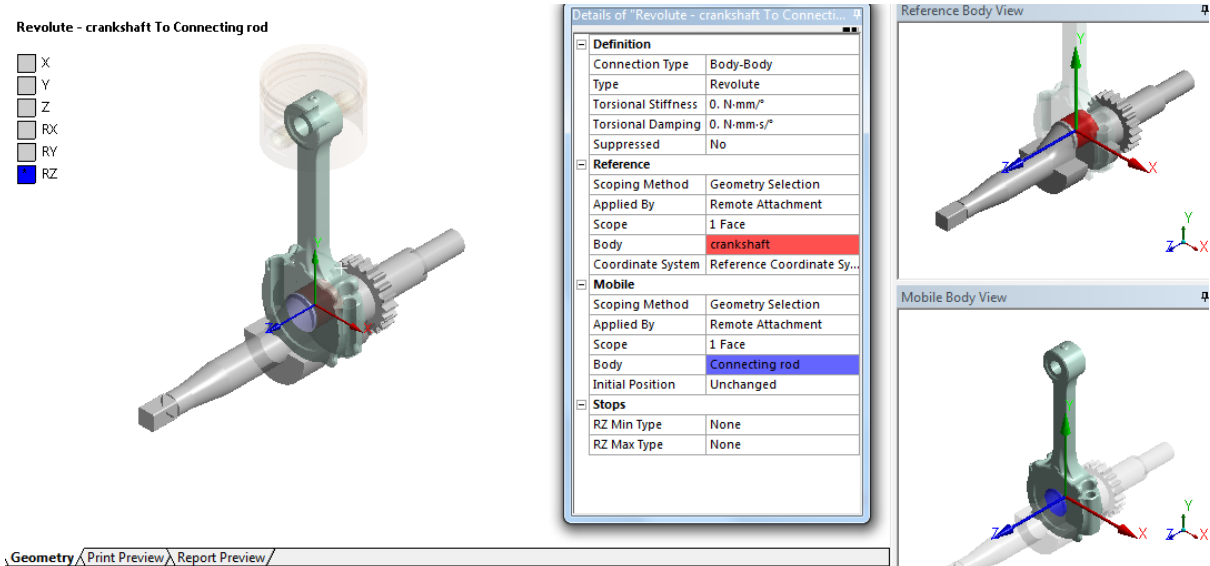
5 Revolute Joints ( connecting rod to Crank shaft )
